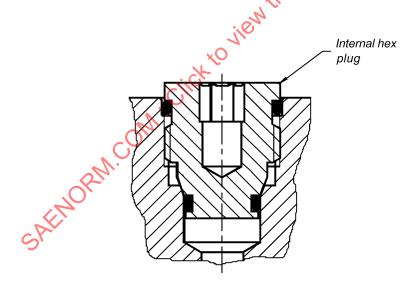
INTERNAL HEX PLUG ASSEMBLY WITH SEALS
